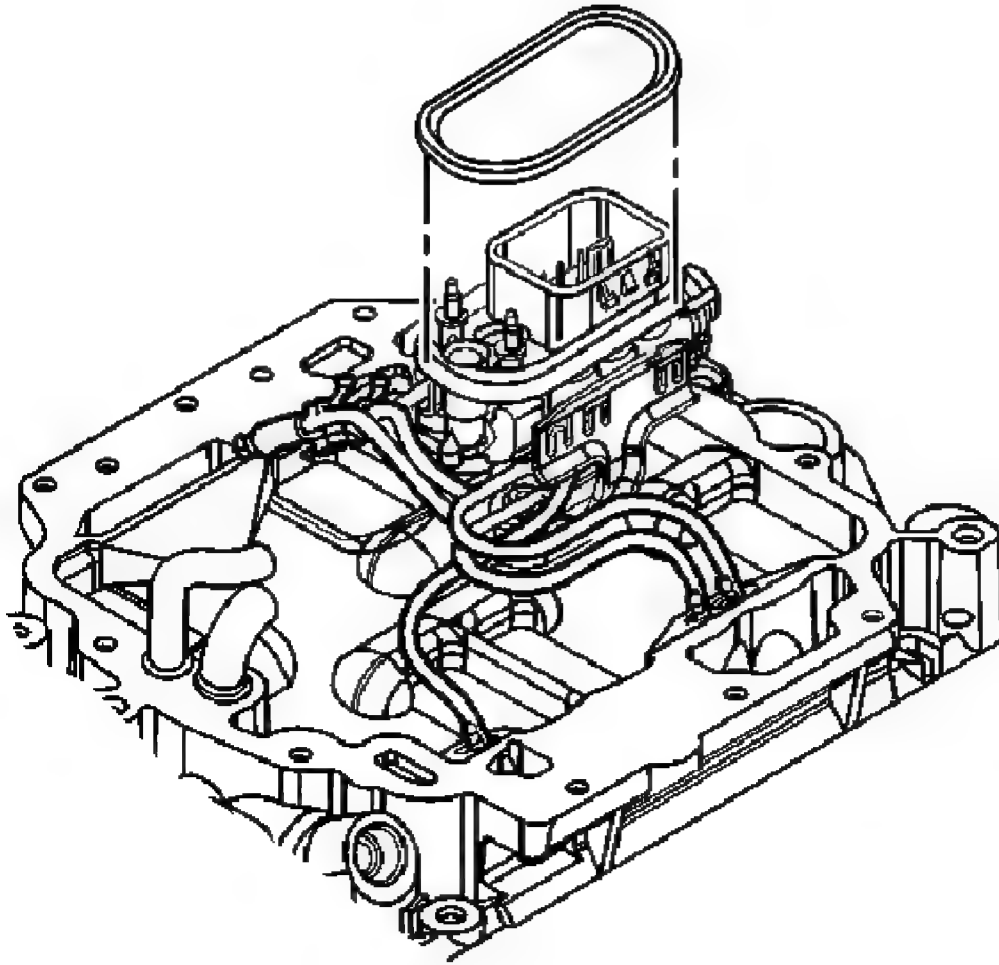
Locating Seal For Fuel Meter Body Assembly
